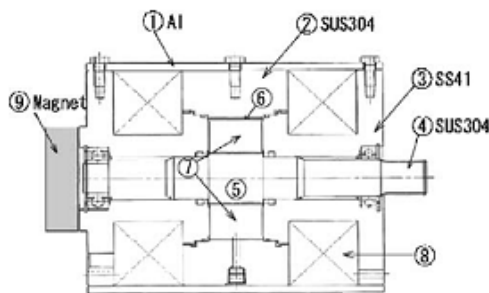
Rotary-type damper. (1) Outer Cylinder, (2) inner Housing, (3) outer housing, (4) shaft, (6) grooves to fix outer disc, (7) MRF, (8) coils, (9) permanent magnet. (after T. Pranoto et al, 2005)
